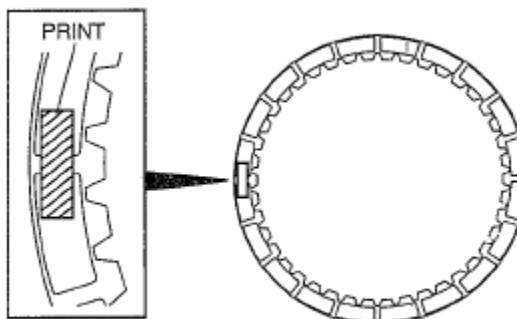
Identifying Retaining Plates, Drive And Driven Plates
